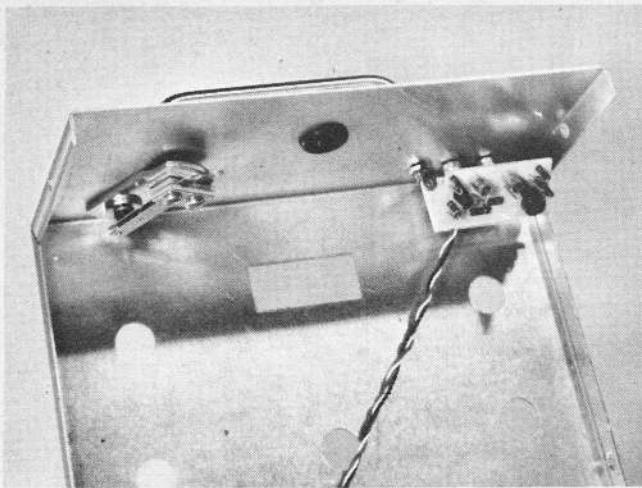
Interior of transmitter case showing position of switch and pulser. Note unit is not wired but bent upward to clear Tx P.C. board.
